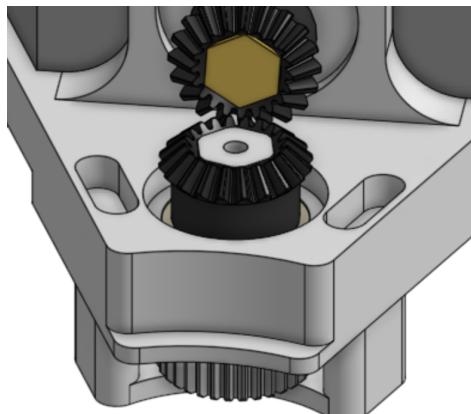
Hex shaft seated through the meshed bevel gear pair.
